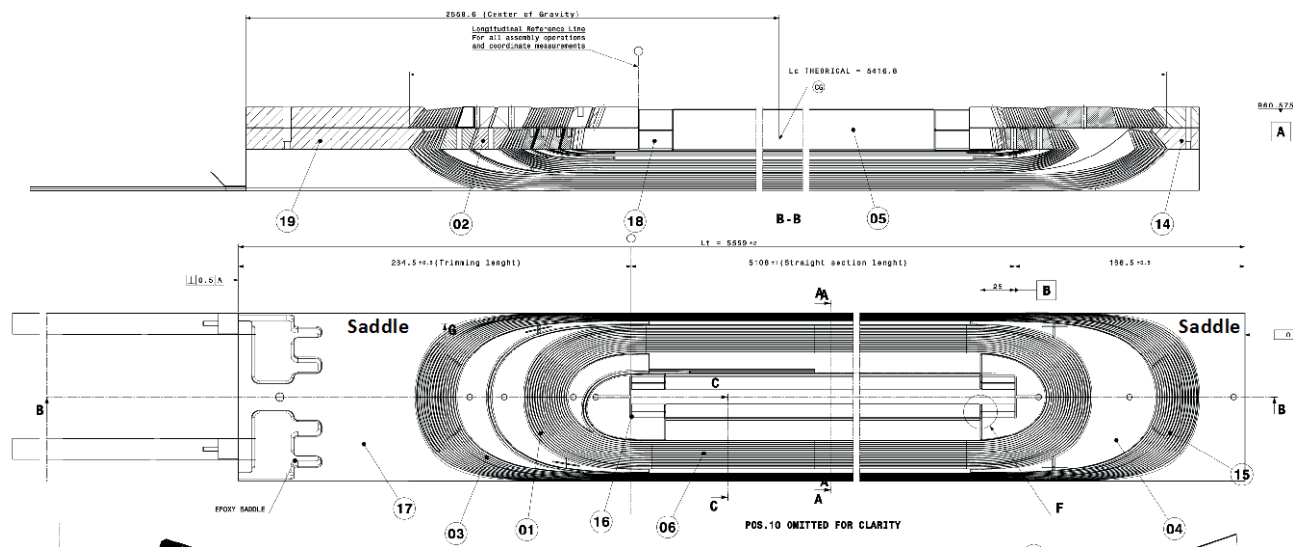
Top and side views of the coil, retrieved from drawing Nb. LHCMBH_C0005.
